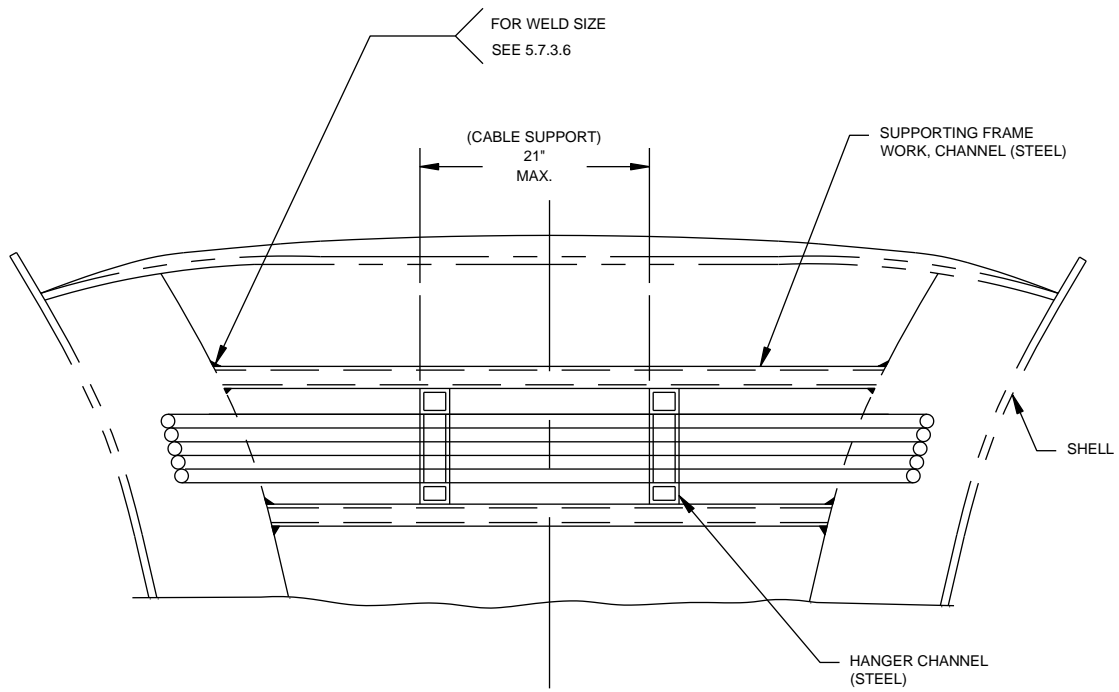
B66. Cable support for degaussing cables (surface ships) – elevation looking outboard.
